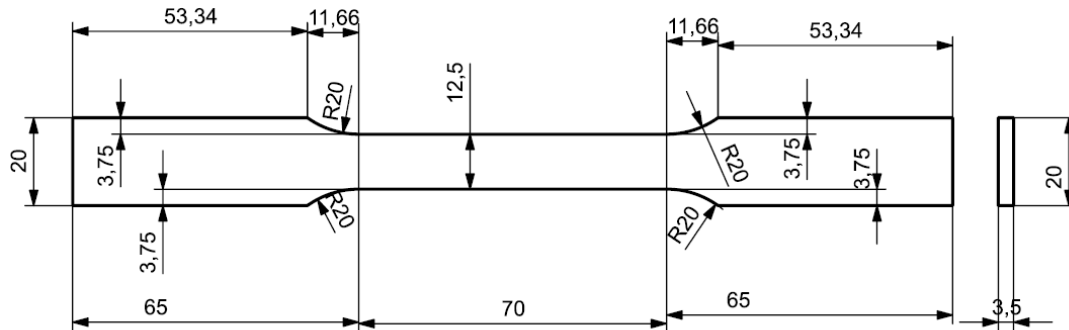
Technical Drawing of Tensile Test Specimen<sup>[37]</sup>
